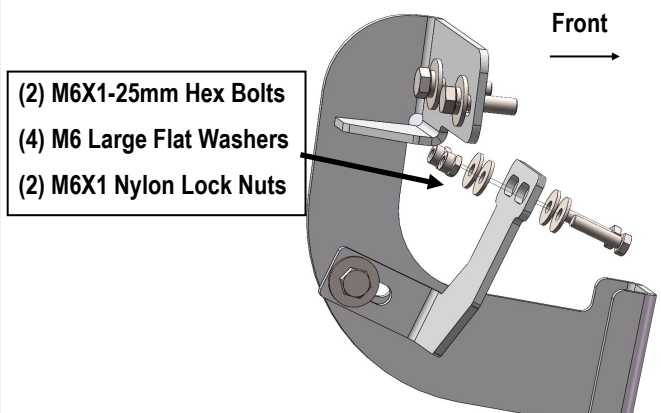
Driver Side Front Models With Factory Installed Threaded Inserts. Bolt Plate Not Required
